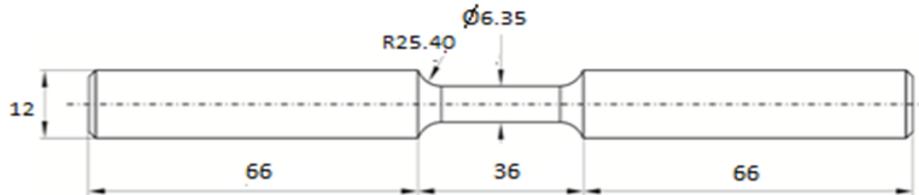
Low-cycle fatigue test specimen's shape and size (ASTM E606-92) (1)
